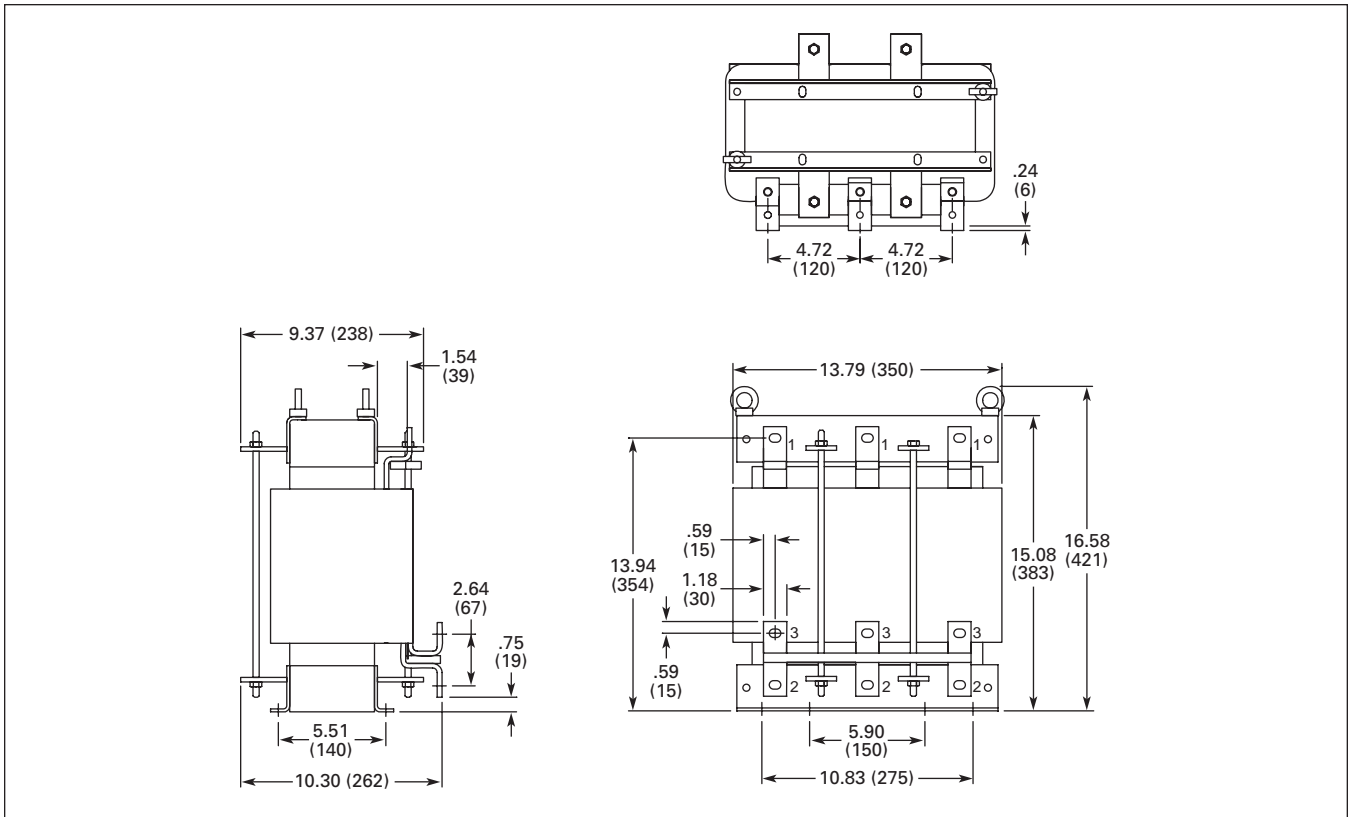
Dimensions of AC Choke CHK0400 in Inches (mm)
